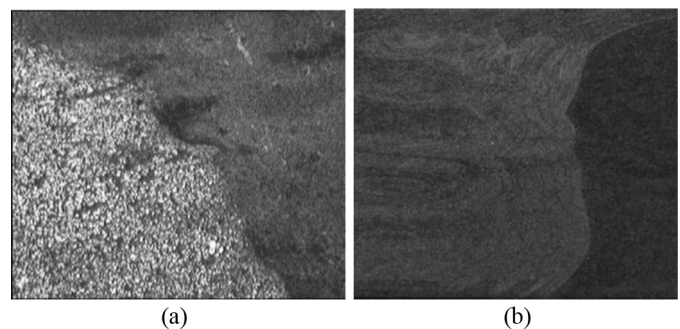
Conventional weldments: (a) boundary line and (b) weld cross-section.
